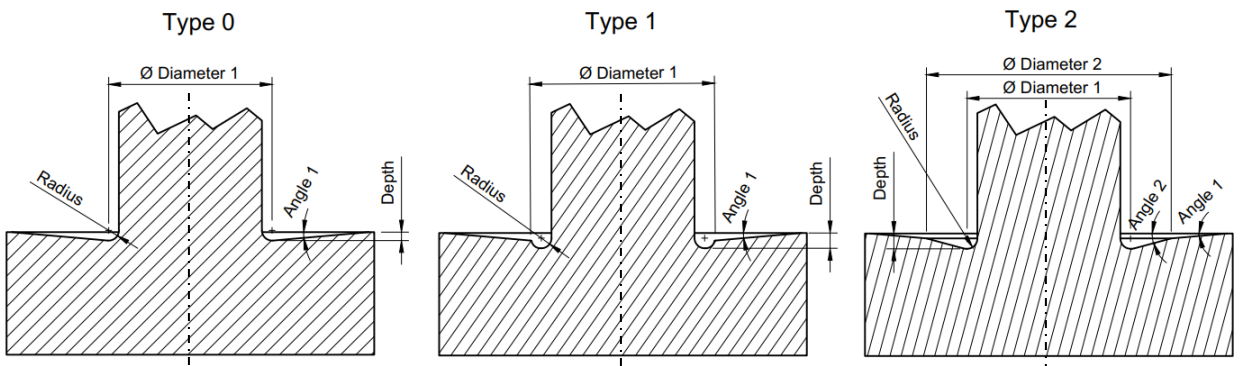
Currently implemented head geometries. Other screw head geometries on request.
